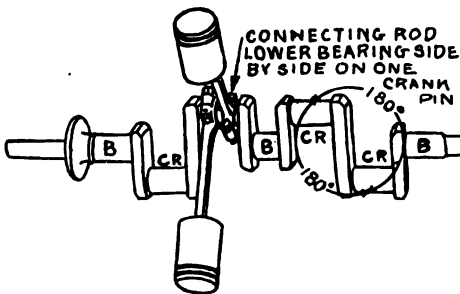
A regular four cylinder type, 180° crank shaft is used on the 8 cylinder "V" type of engine. Two connecting rods are placed on one crank pin; either side by side, or yoked (see fig. 7, chart 34).
